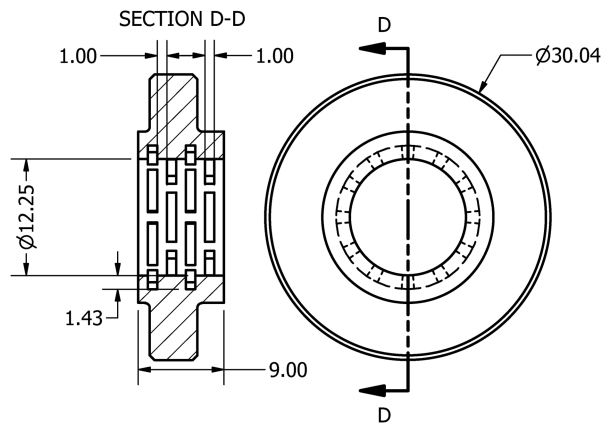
Geometry of the PGS showing the main dimensions in mm.
